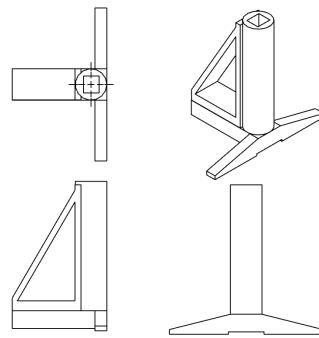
Sketch of Wall Mount (front, top, right, isometric)
